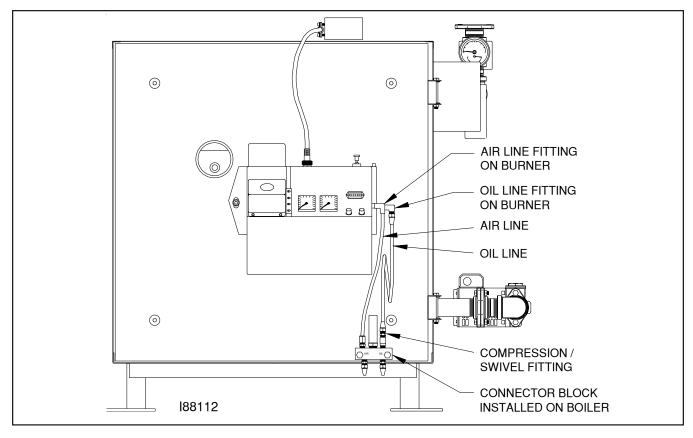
J - Installation of Connector Block, Oil Line and Air Line (Front View)
